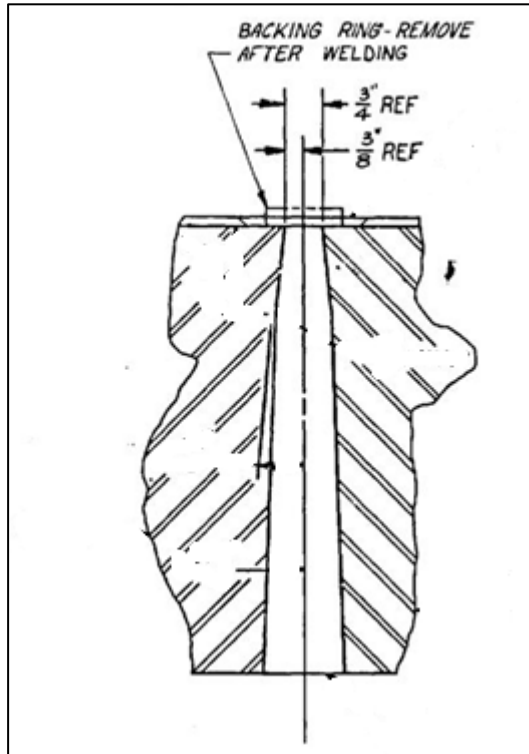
Plant A Nozzle Shell to Intermediate Shell Circ Weld
